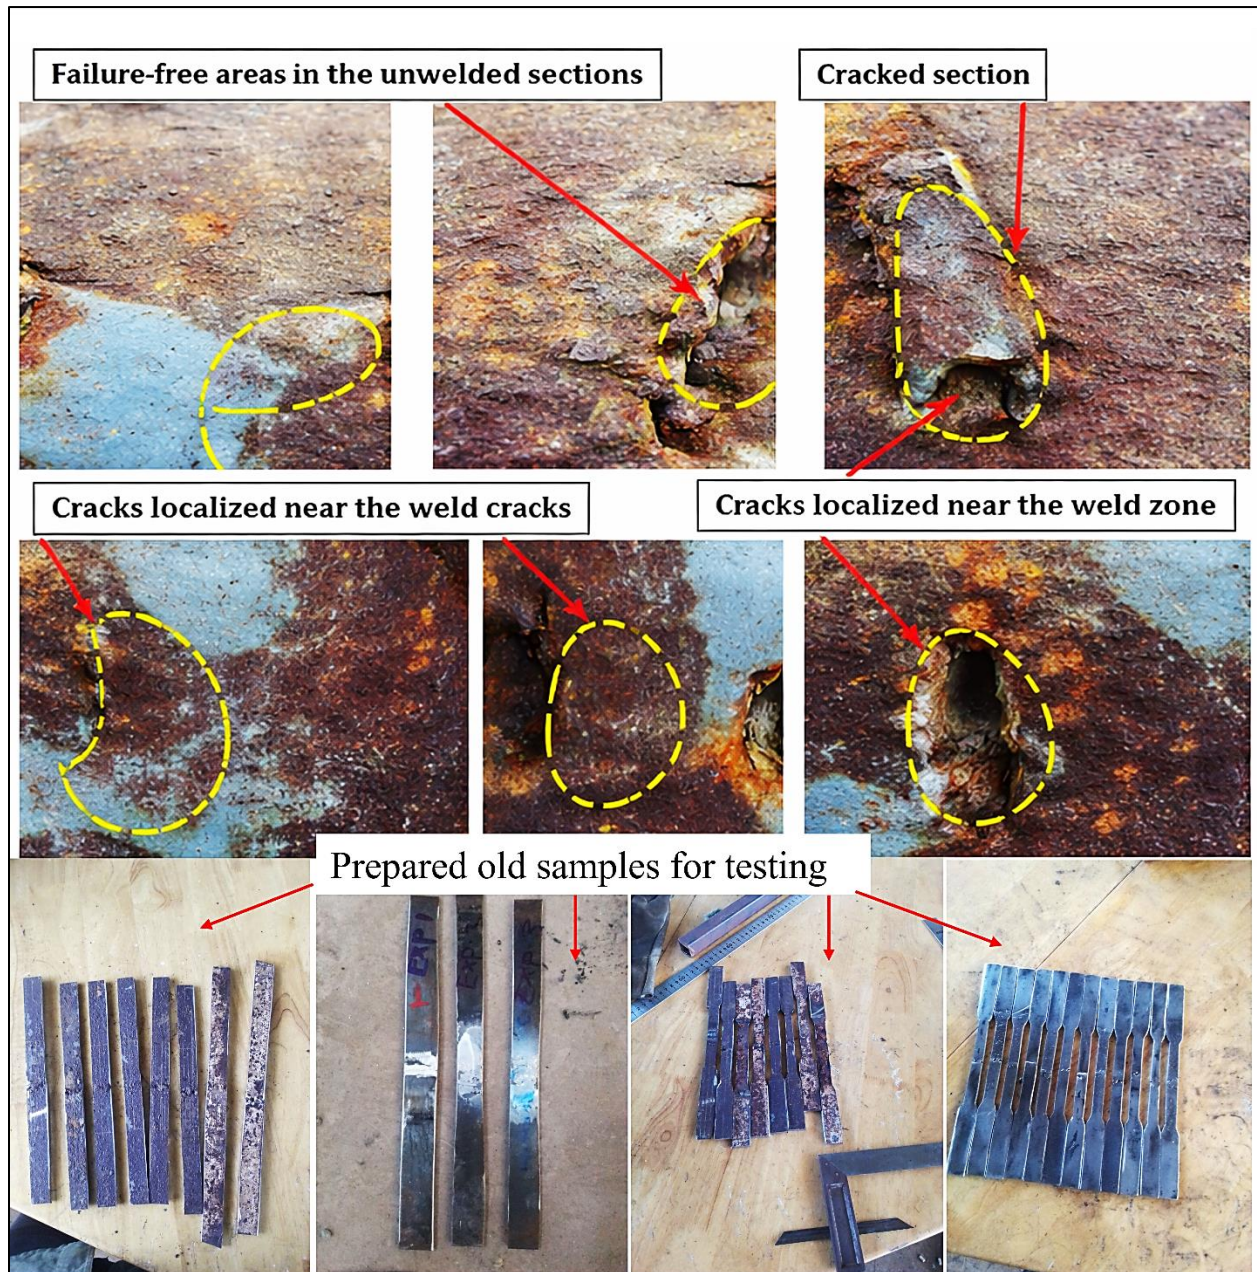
2 Visual inspection of welded joints showing localized defects, including cracks near the weld zone, discontinuities along the welded seam, and intact failure-free regions in the unwelded sections.
